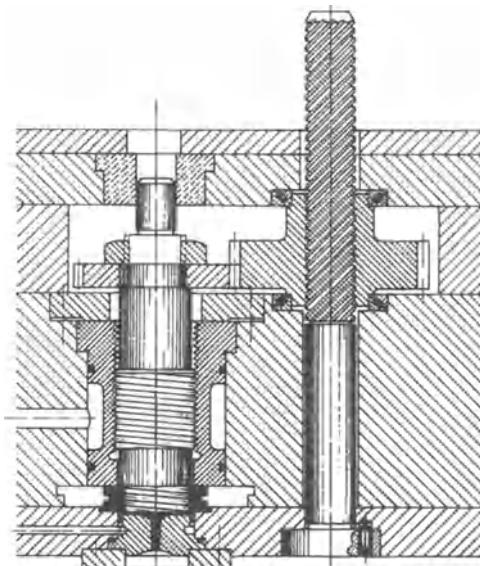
Mold with rotating core that operates during mold opening and closing. The drive gear rotates via the worm shaft, which in turn transmits rotation to the geared core. The core unscrews the threaded molded product.
